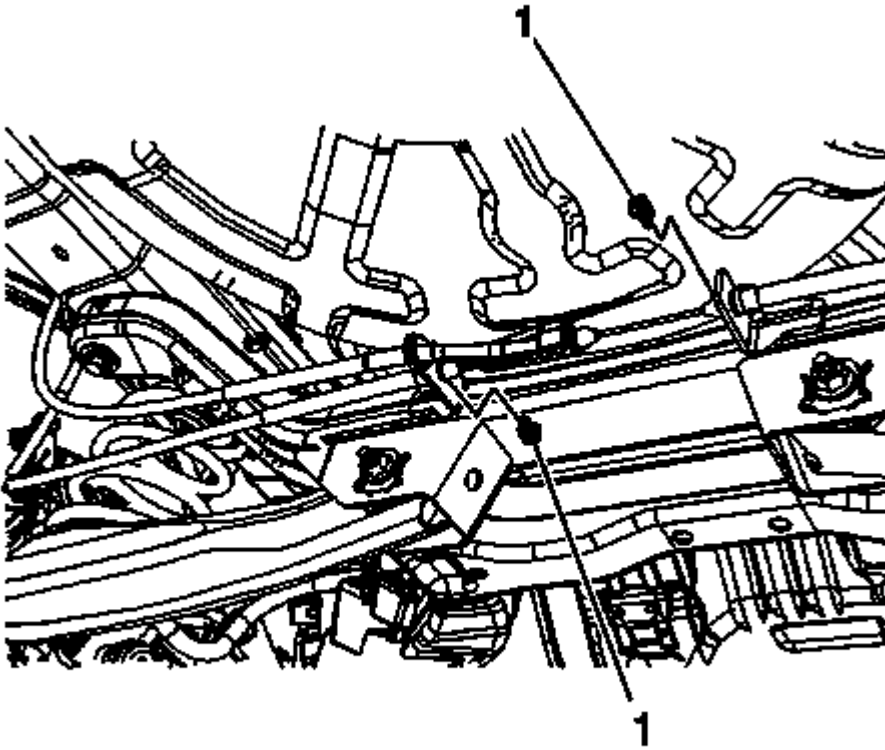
Rear Parking Brake Cable Retainers And Rear Frame
